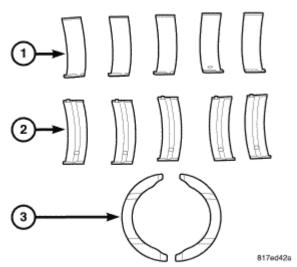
BEARING IDENTIFICATION Courtesy of CHRYSLER LLC
